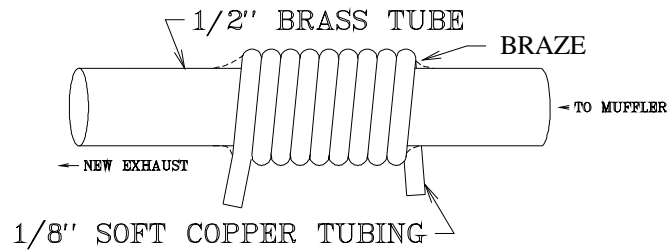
MAKING YOUR OWN HEAD COIL
